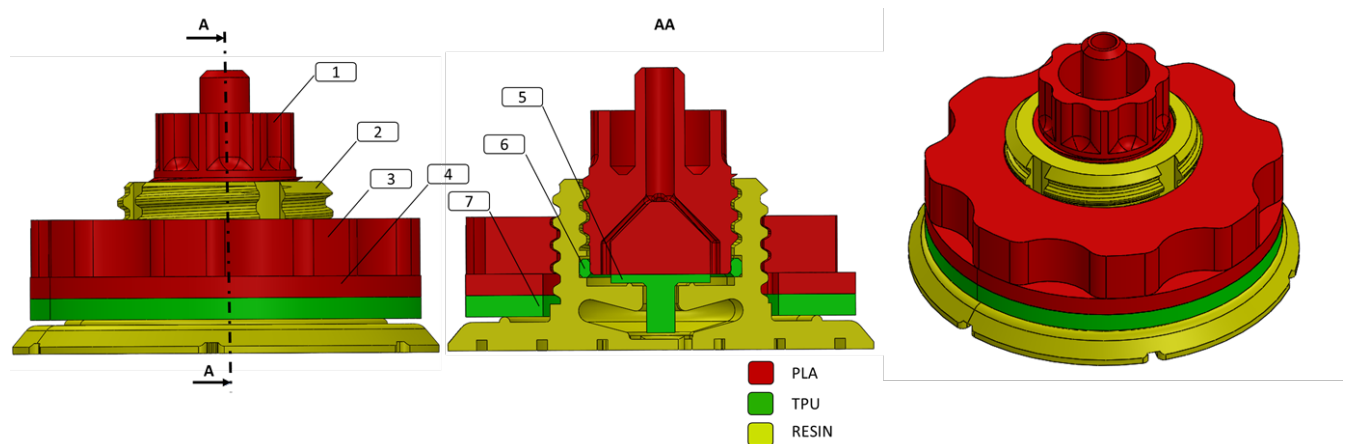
1. check valve body; 2. main body; 3. threaded ring nut; 4. anti-rotation spacer; 5. valves; 6. gasket; 7. main gasket
